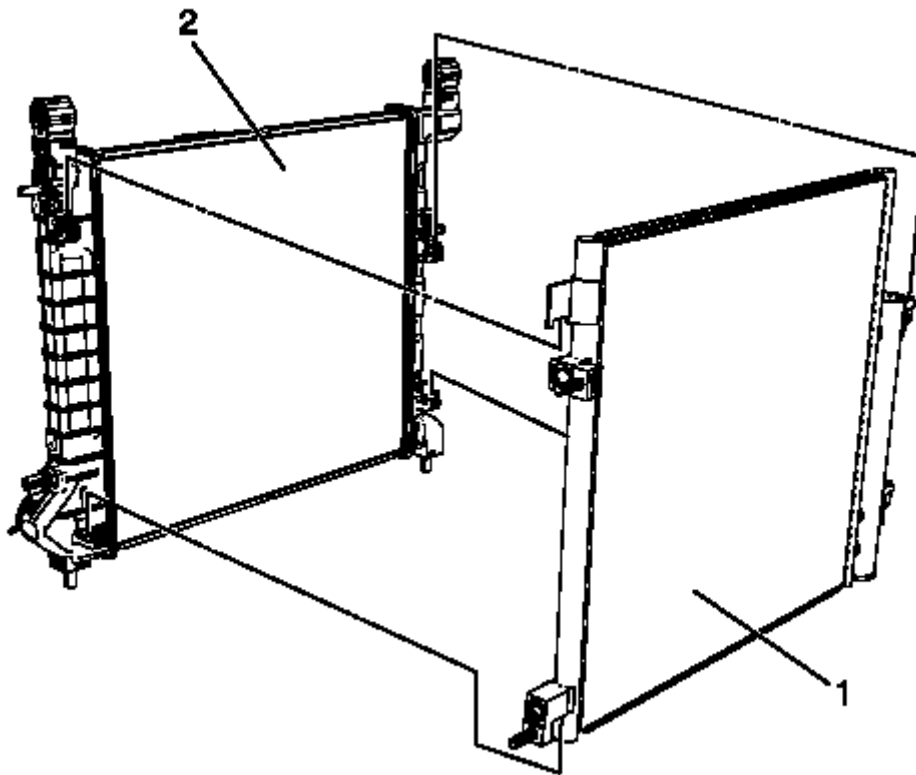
Identifying Air Conditioning Condenser & Radiator
